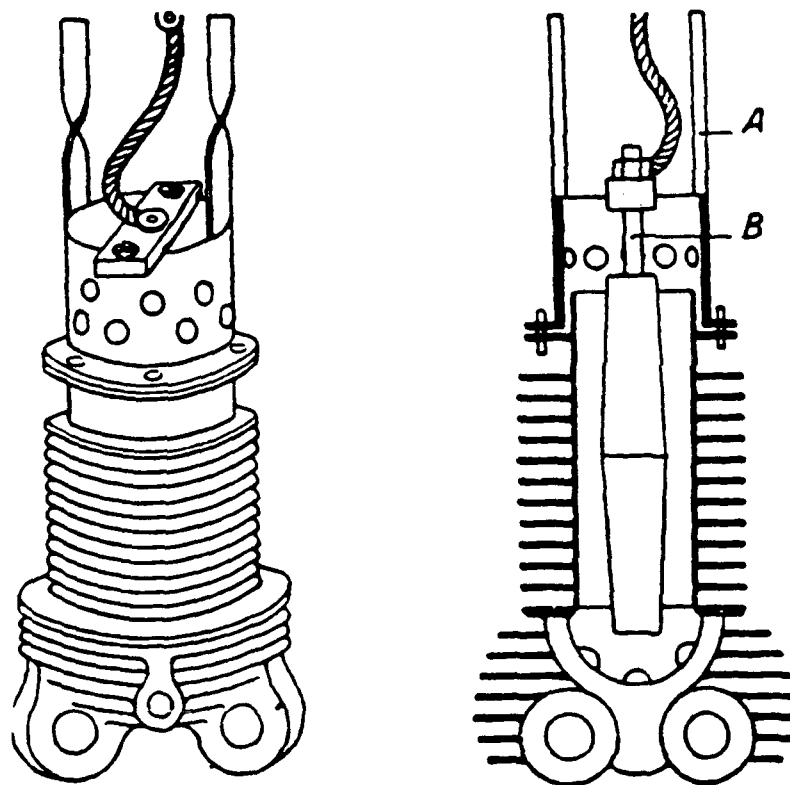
Perspective and sectional views of complete arrangement for plating the inside of a cylinder liner.
